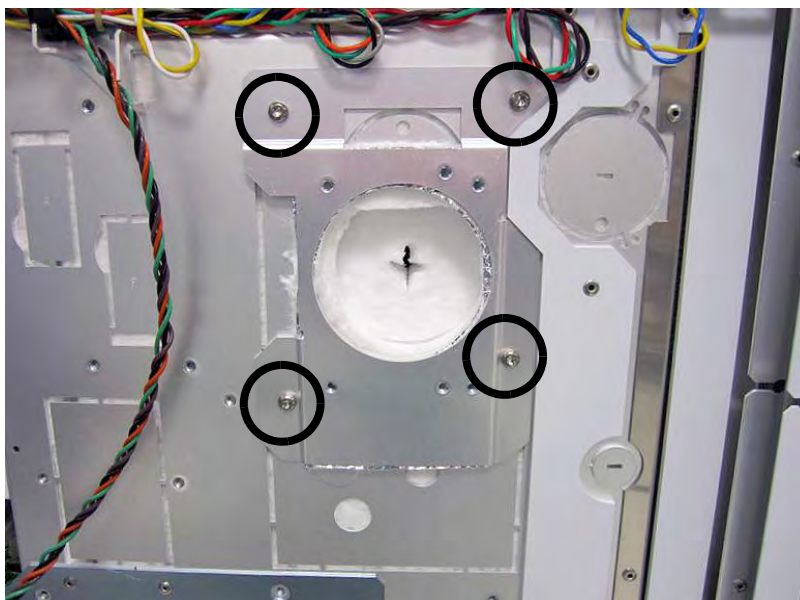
3rd detector adaptor plate installed using four 12 mm M4 screws
